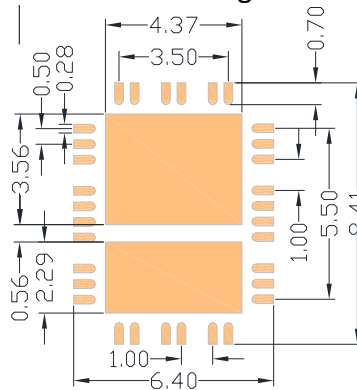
PD70224 Top layer Copper Recommended PCB Layout (mm)
